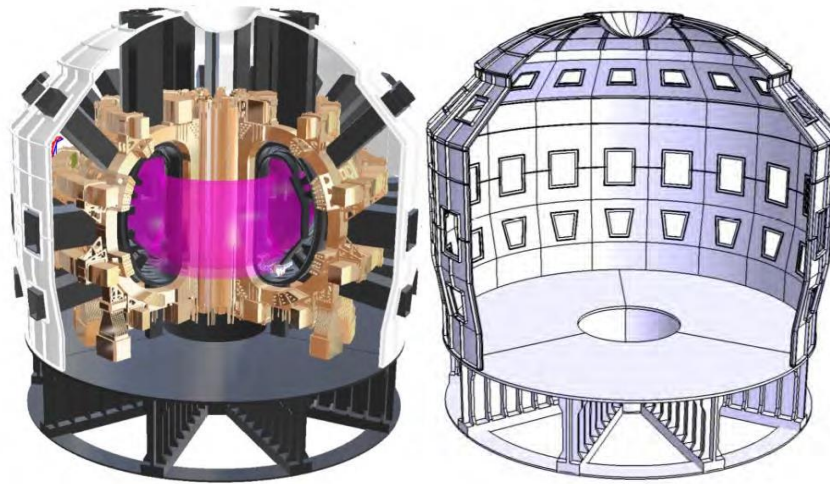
Pictorial view of DTT tokamak basic machine (left); 3D CAD model of DTT Cryostat (right).
